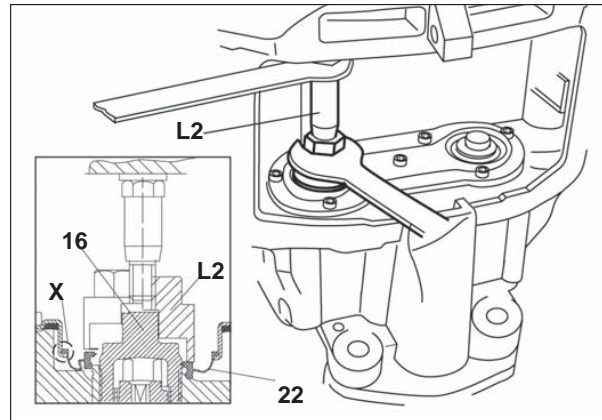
OFF-VEHICLE INNER SEAL INSTALLATION
